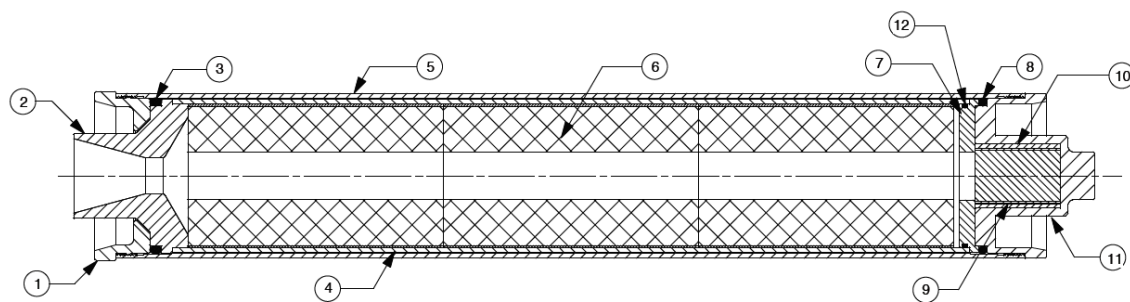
Drawing of the AT M2400T assembly. 1) AFT Closure 2) Nozzle 3) AFT O-ring 4) Casing 5) Phenolic Liner 6) Propellant Grain 7) Seal Disk 8) FWD Closure O-ring 9) Smoke Charge 10) Smoke Charge Insulator 11) FWD Closure 12) Seal Disk O-ring.
